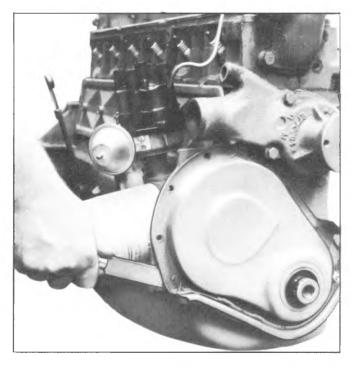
A-31--Cutting Tabs on Oil Pan Front Seal
